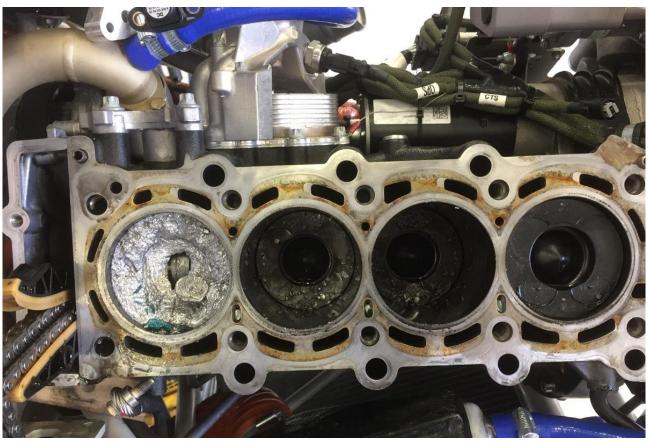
The engine's piston crowns. Cylinder 1 can be seen on the far left. The top of the piston rod (grey in colour) can be seen in the hole near the centre of piston 1. A broken exhaust valve is lodged in the piston. Coolant residue (turquoise in colour) can be seen on the piston crown. Photo: NSIA
